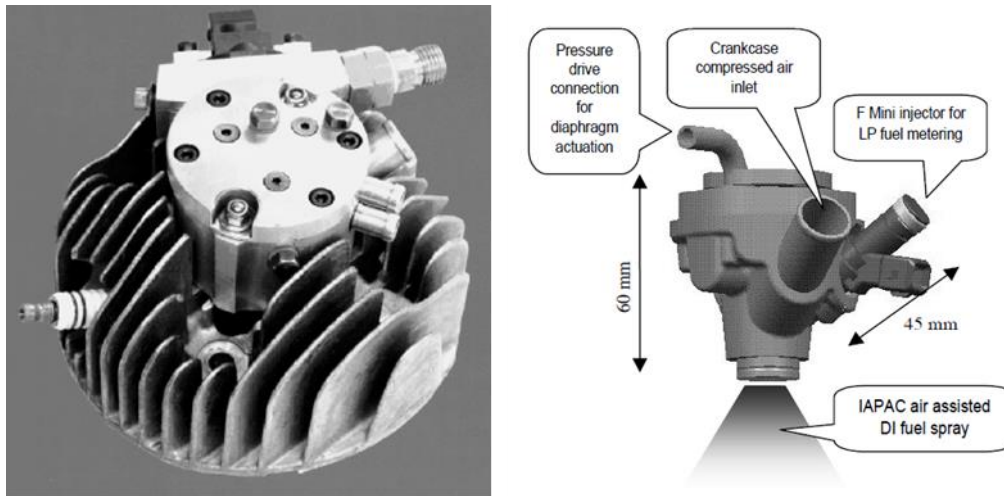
Standard cylinder head with SCIP unit of a 125 cm³ scooter engine and CAD view of the SCIP unit with SAGEM injector [128, p. 5; 6]
